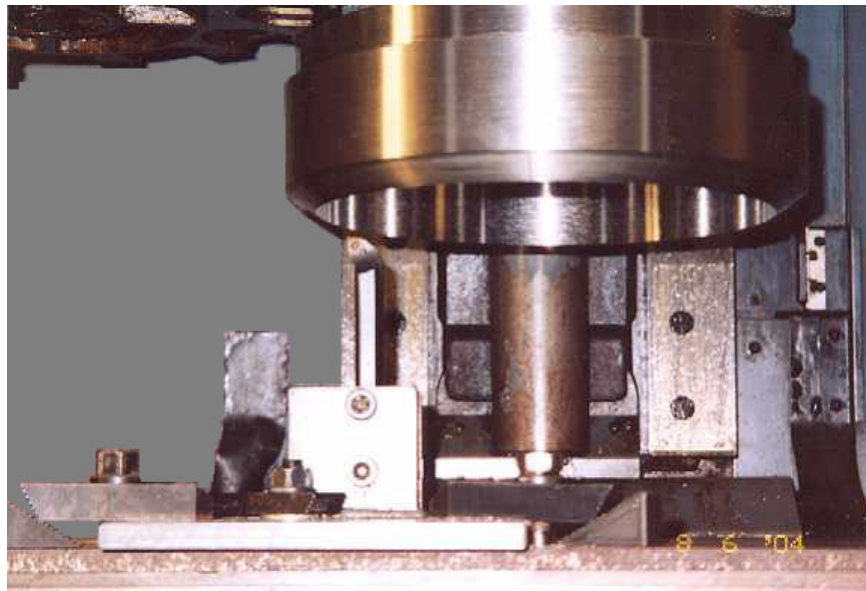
Photograph of the set-up used for machining the inner surfaces of the spindle
